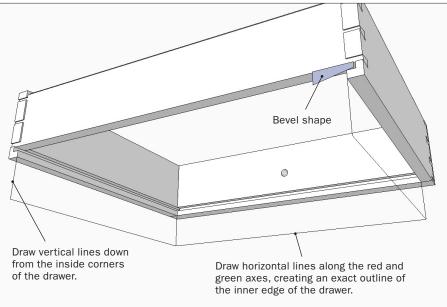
Draw a path so that the Follow Me Tool can extrude the beveled edge.
